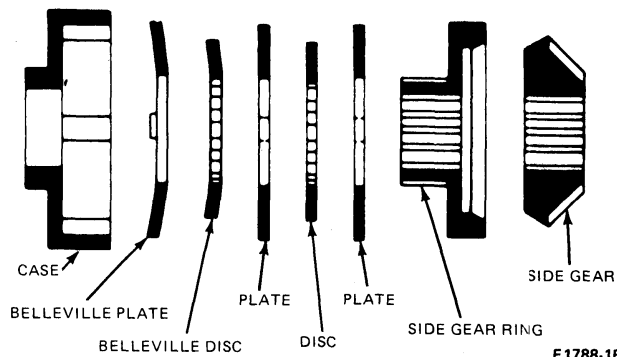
Clutch Installed in Drive Gear Case Half—Model 70
